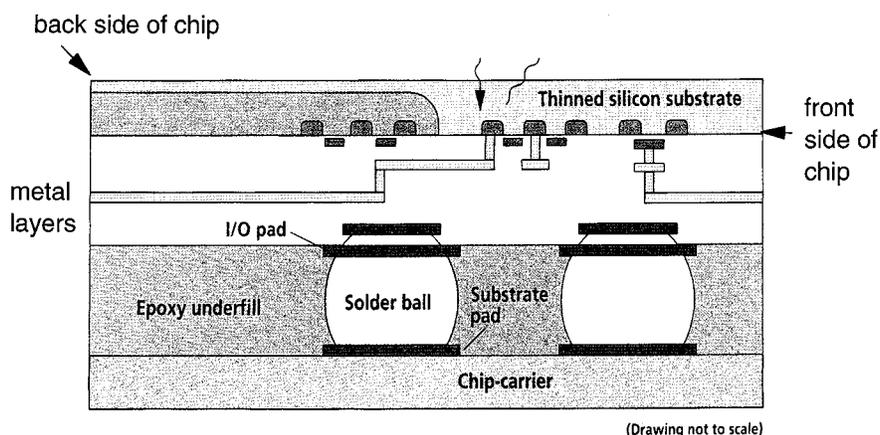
Schematic of the cross section of a modern silicon integrated circuit showing multiple layers of metallization, solder balls for flip-chip packaging, and defining the front and back sides of the chip [3].
